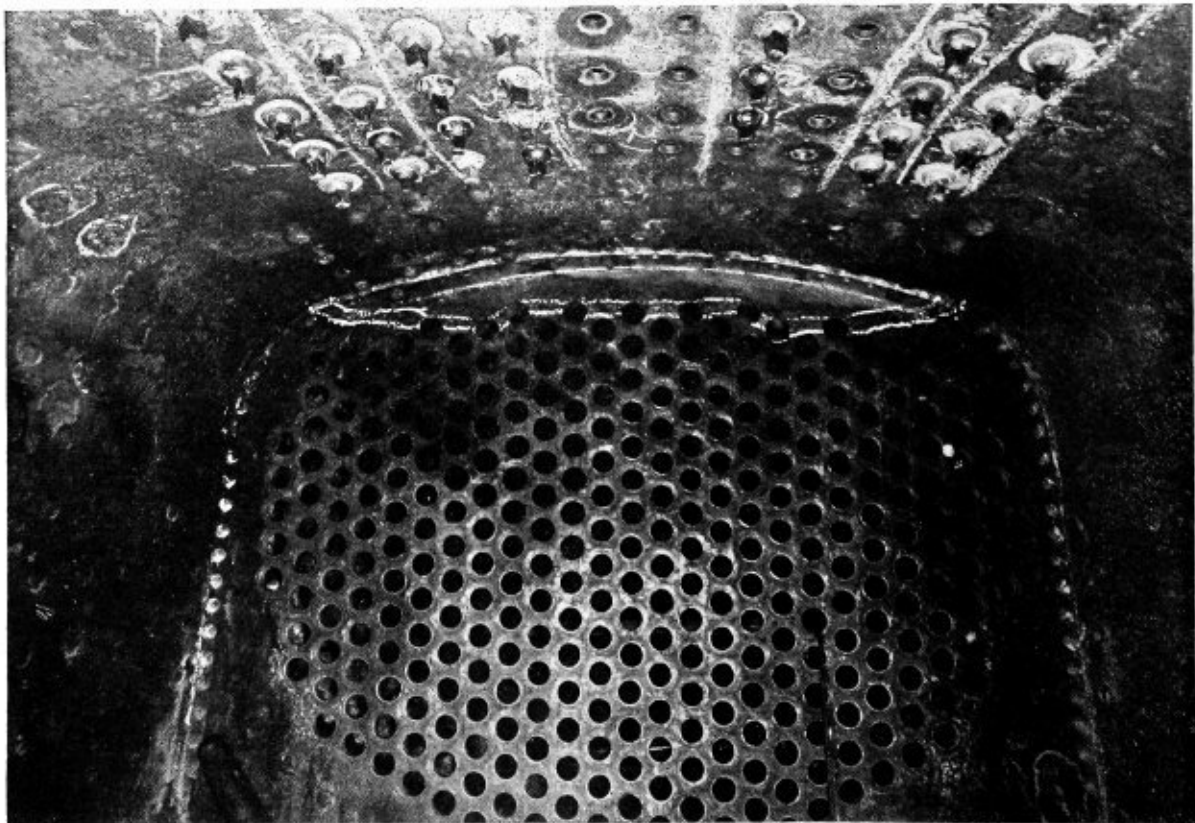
Top of Back Flue Sheet Patched with Oxy-Acetylene Welding
